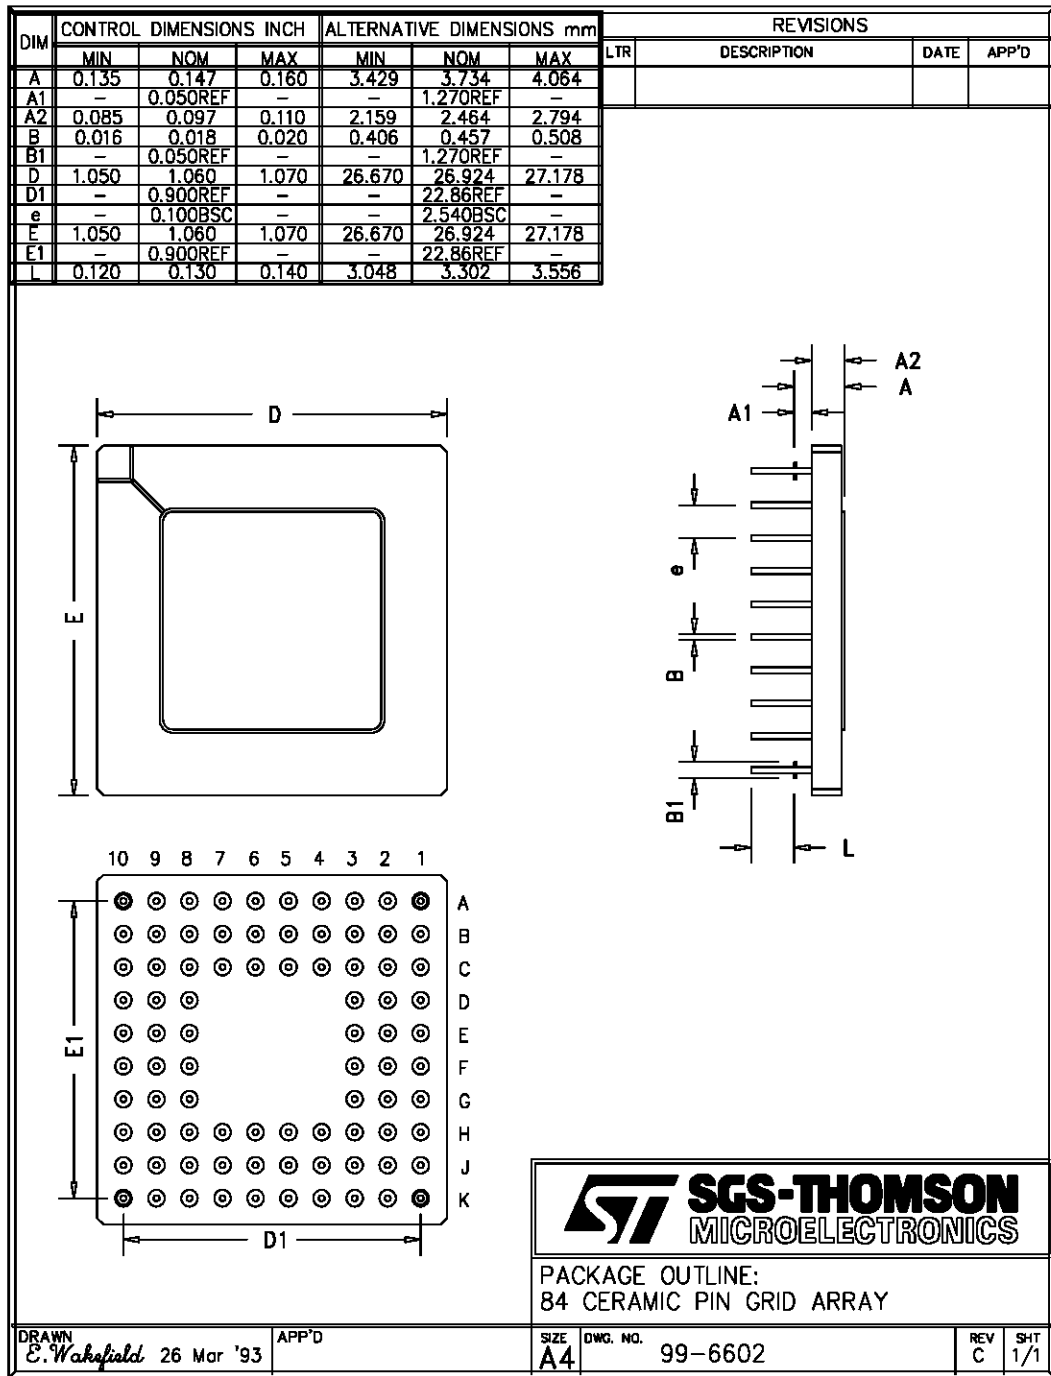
IMSC004 84-pin grid array (PGA) package dimensions
